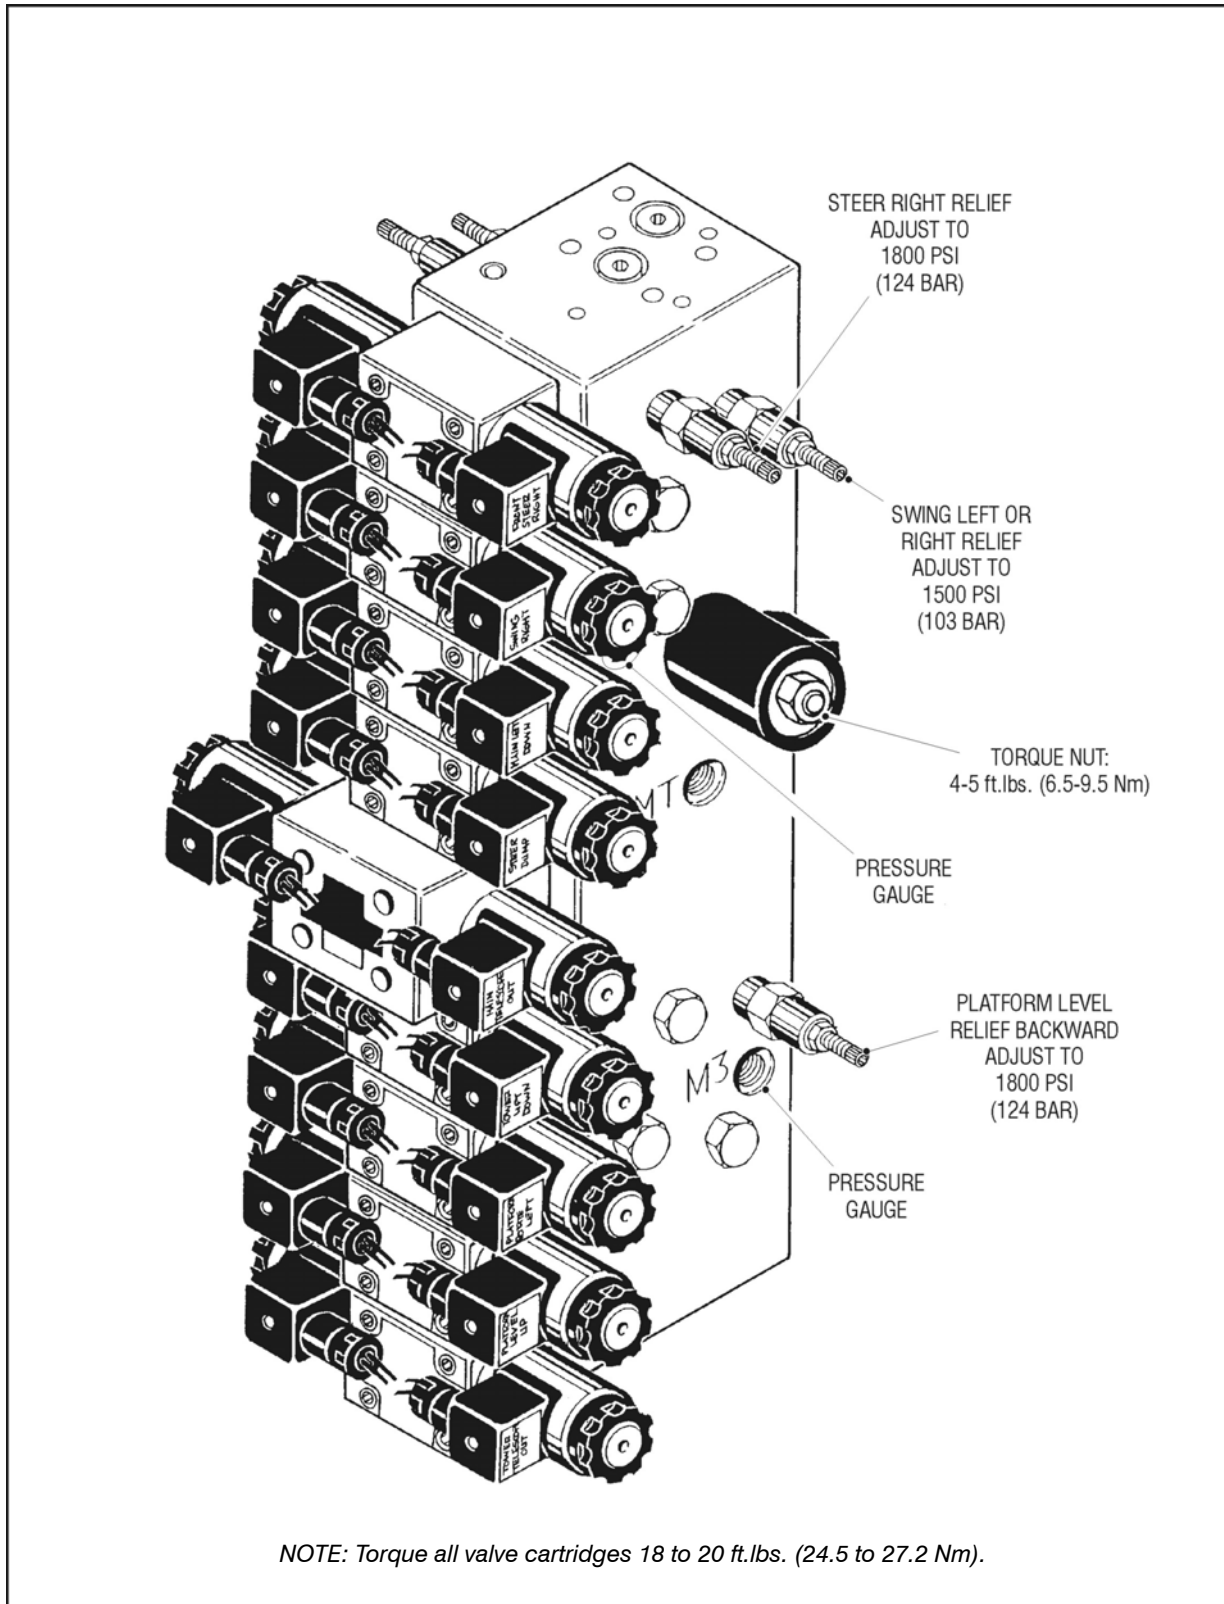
Main Control Valve Pressure Adjustments - Sheet 2 of 2
